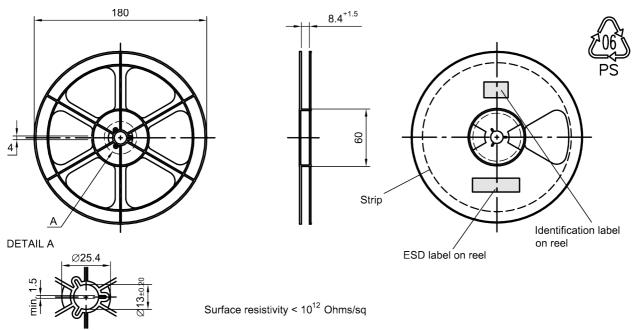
Drawing of reel (first-angle projection) with diameter of 180 mm.
